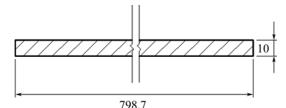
Cross-sectional shape and dimensions of extrudate (unit: mm)
